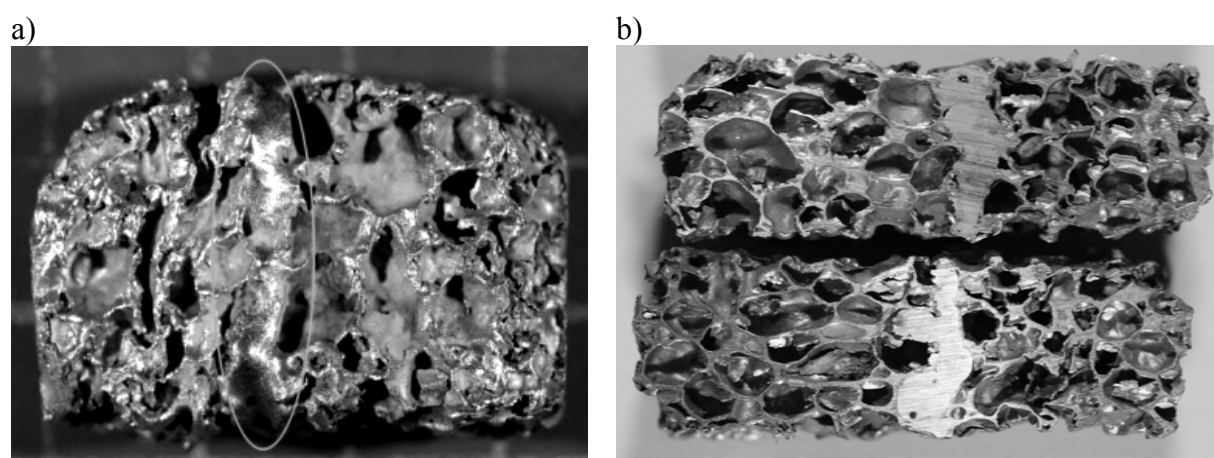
AlSi foams used for solder spreading investigation; ZnAl22 solder with a flux in a core was used:
